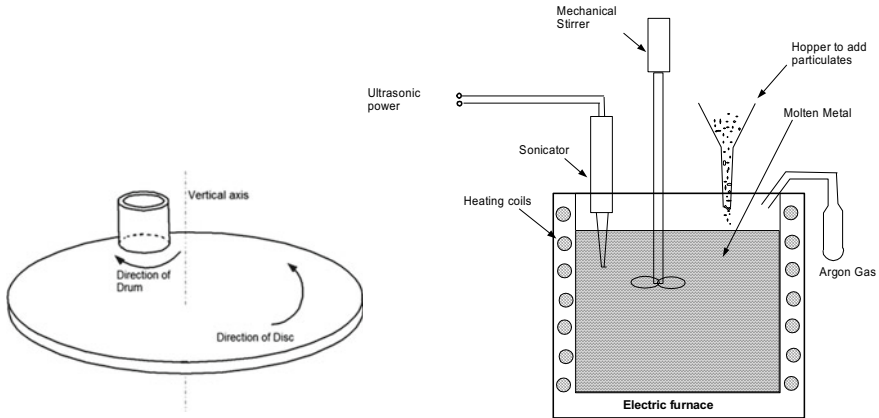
Planetary ball mill and stirrer furnace with ultrasonicator
